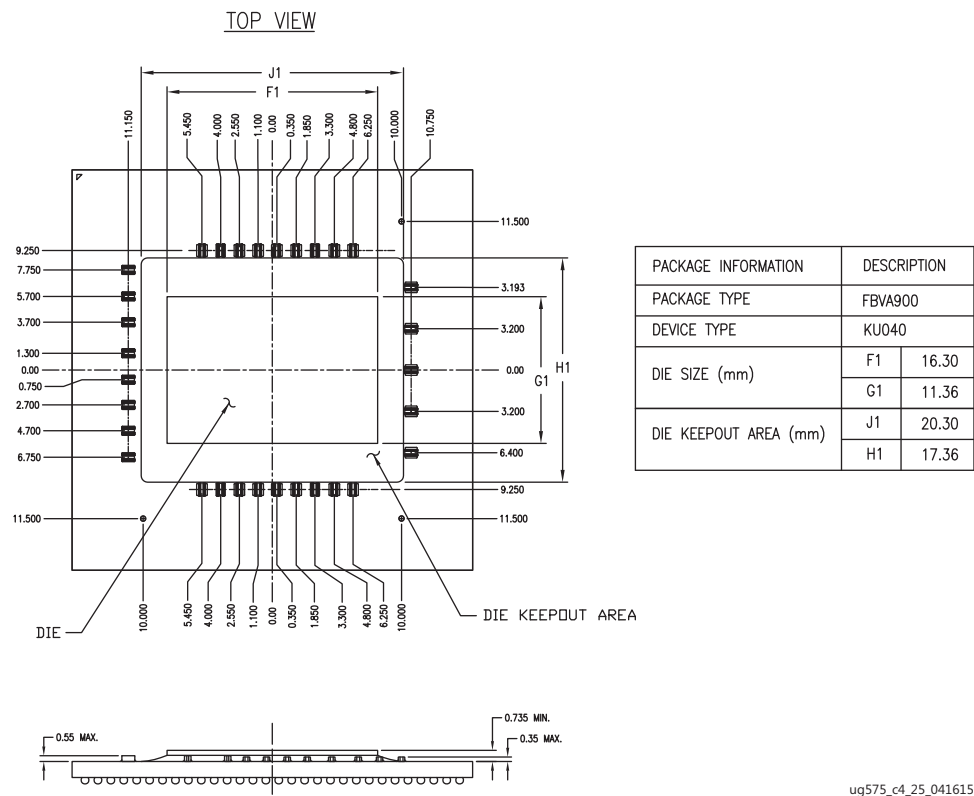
FBVA900 Package (XCKU035 and XCKU040) Die Dimensions with Capacitor Locations
